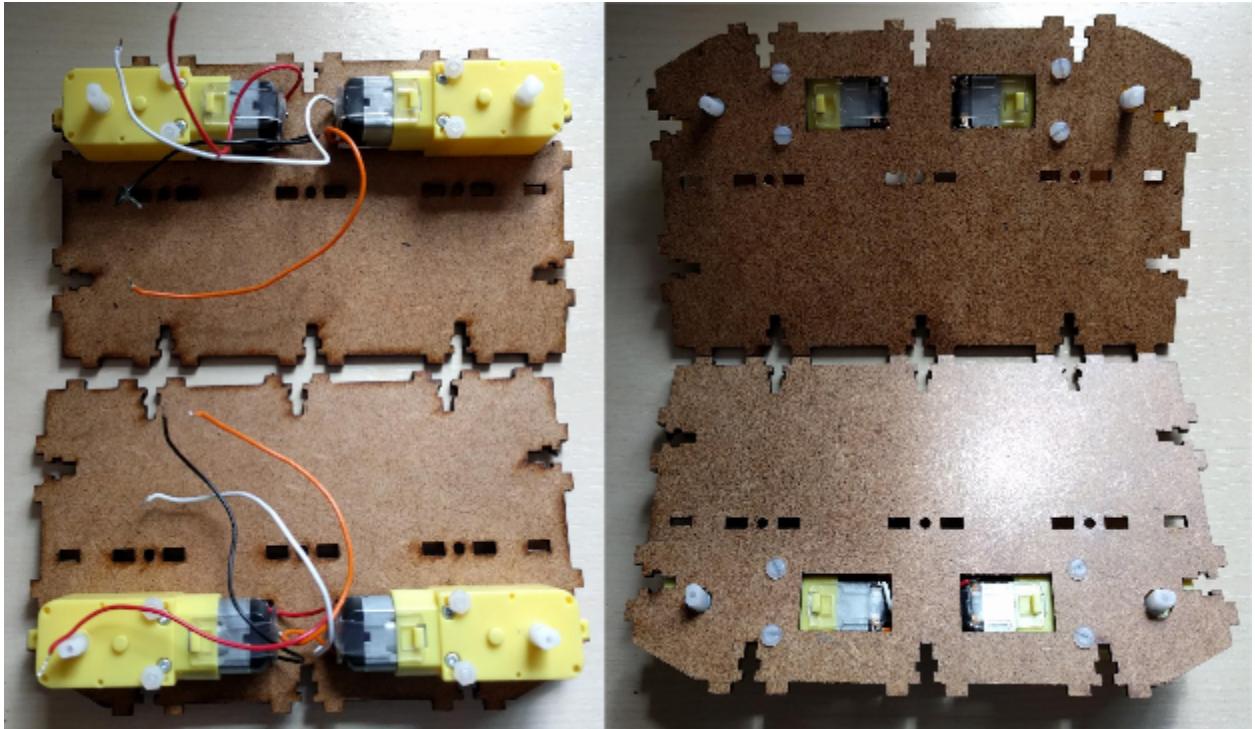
Front and back view of 4 motors screwed down to the long side plates 1a and 1b
